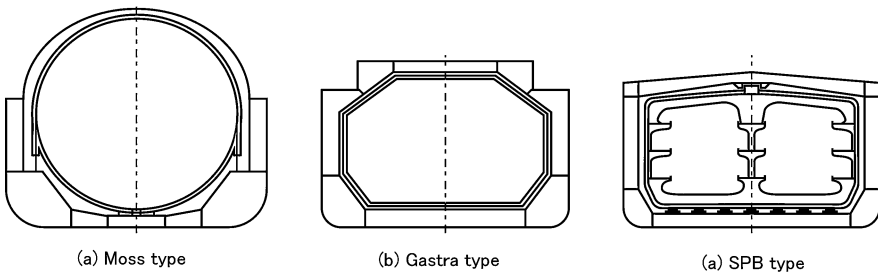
Typical midship section of liquefied gas carriers
